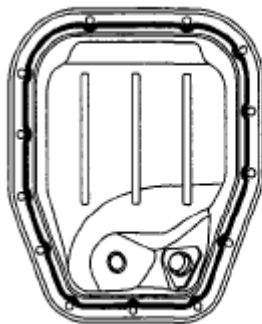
Applying Liquid Gasket To Matching Surface Of Oil Pan Lower
